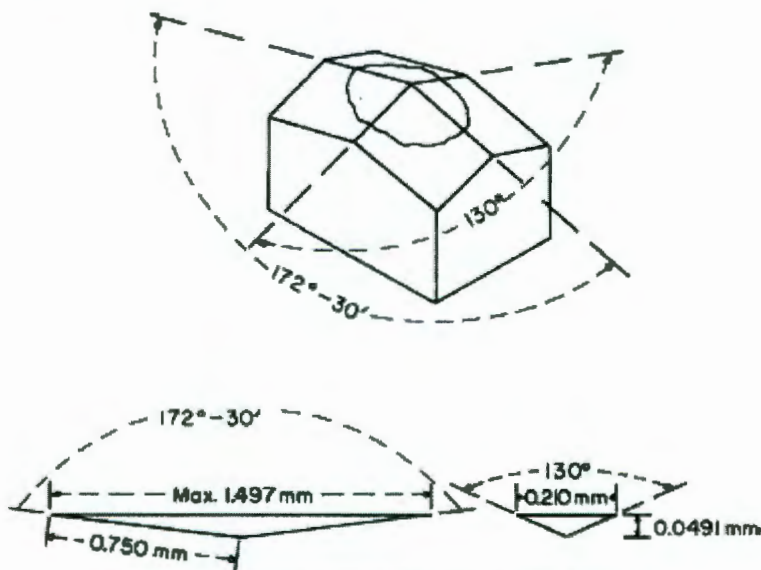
Knoop Indenter Showing Maximum Usable Dimension
